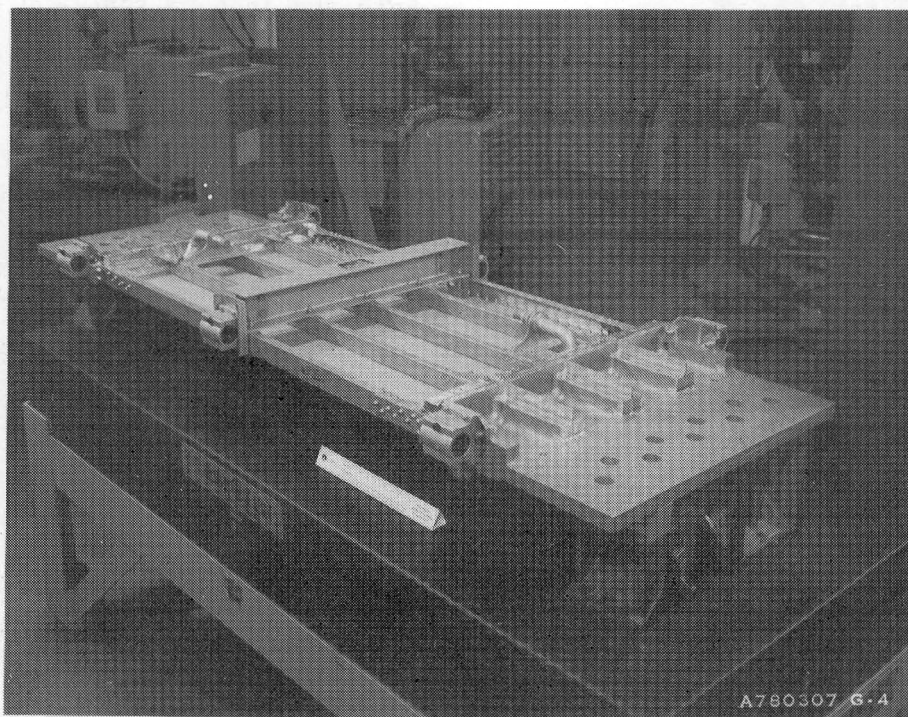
TA Inboard Side Showing Fiberfax Insulation Installed
